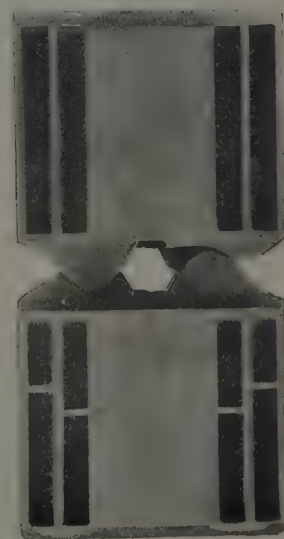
Bradford Type K Draft Gear Assembled with Cages.
